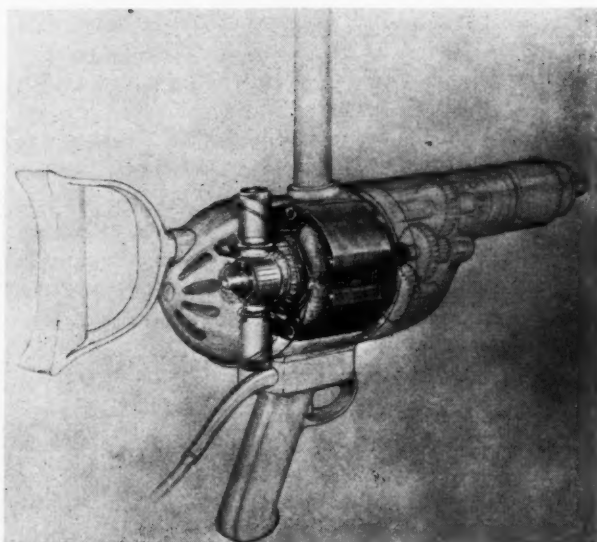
Phantom view of a portable drill showing the application of high-speed shell-type motor to provide lightweight, compact drive
